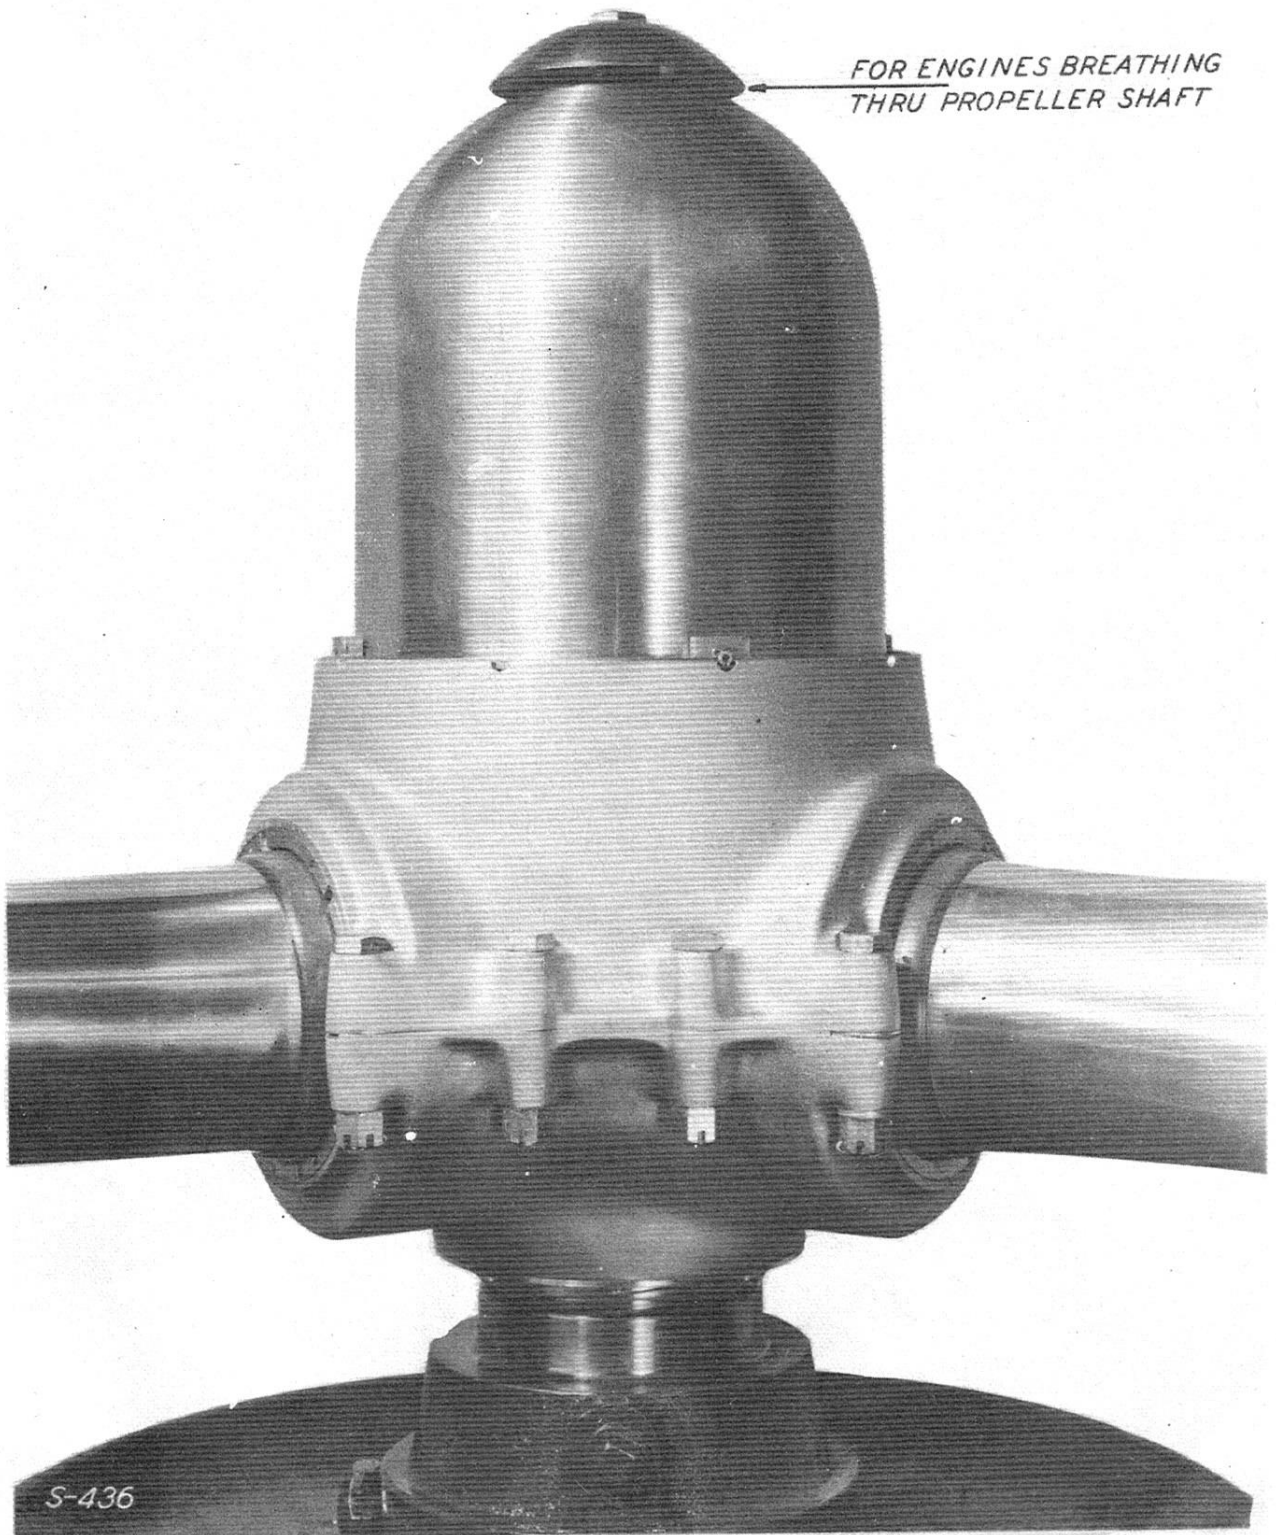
COMPLETE ASSEMBLY FOR BENCH TEST
